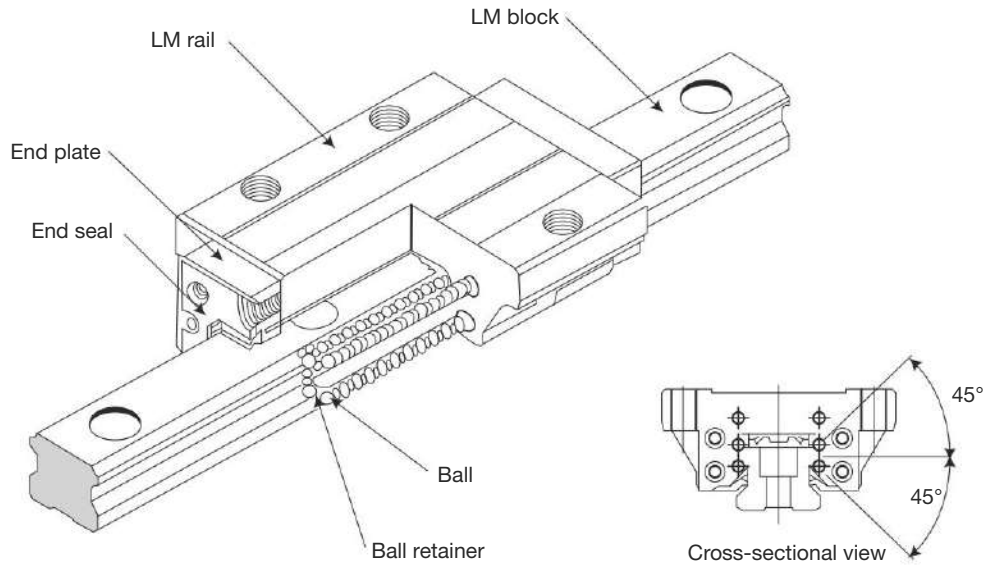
Antifriction guideways used in CNC machine tools (Courtesy, THK Co. Ltd., Japan)
